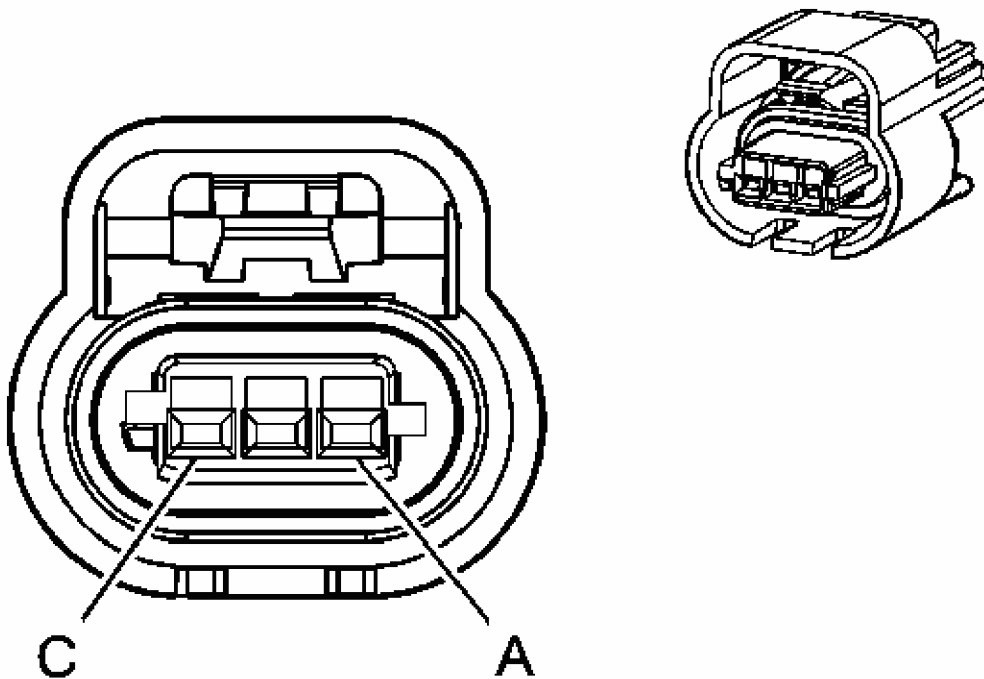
Suspension Position Sensor - RR (F55) Connector End View
